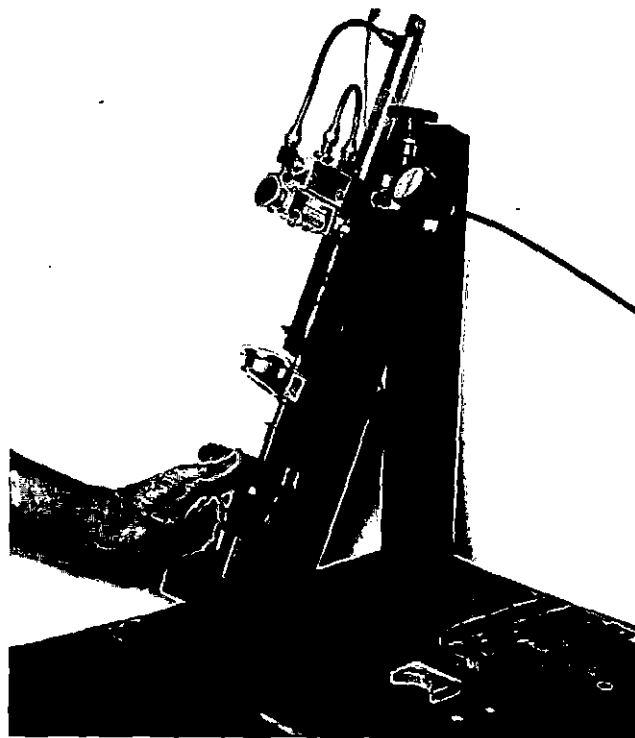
, (F60315). Injector in the plunger sticking tool
